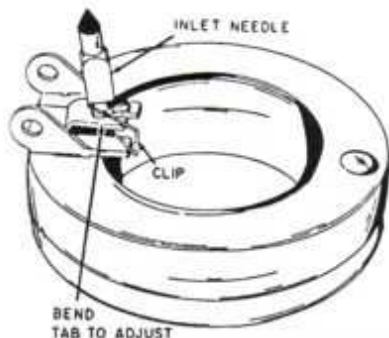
View of float and fuel inlet valve needle. The valve needle shown is equipped with resilient tip and a clip. Bend tab shown to adjust float height.
